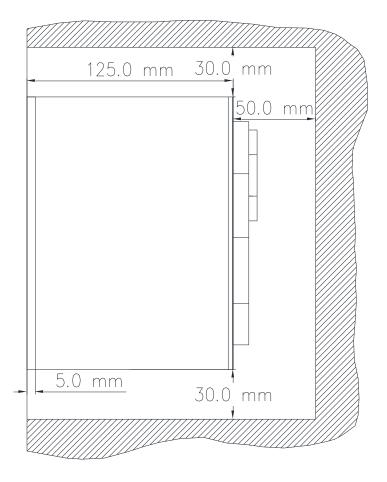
FPC 200 side view with recommended spacing and grounding connection
